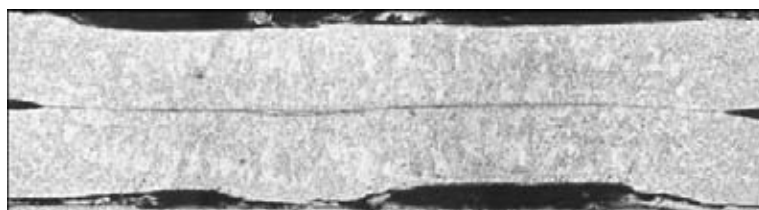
Macrostructure of spot welded joint with small weld nugget of about 2.0 mm in diameter:  $I = 7.3$  kA,  $t = 20$  pulses,  $P = 190$  daN ( $\times 40$ )
